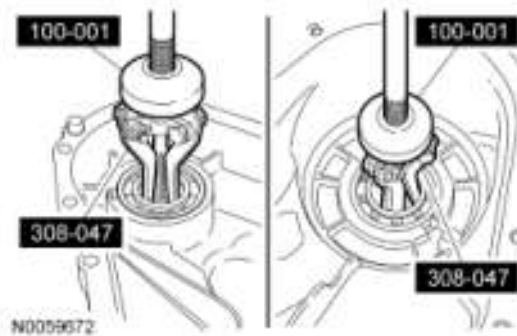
Removing Bearing Using Special Tools (100-001, 308-047)
